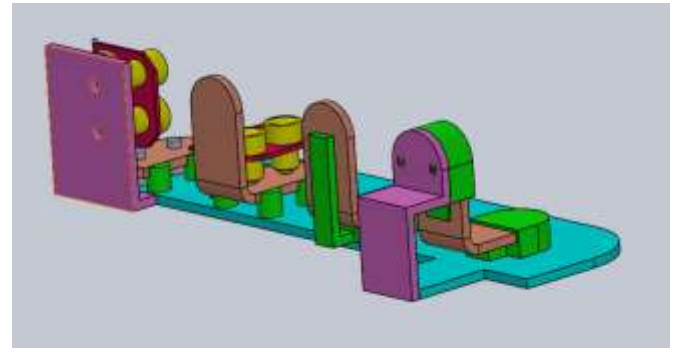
Assembly Back Isometry View of Jig and Fixture Tool
